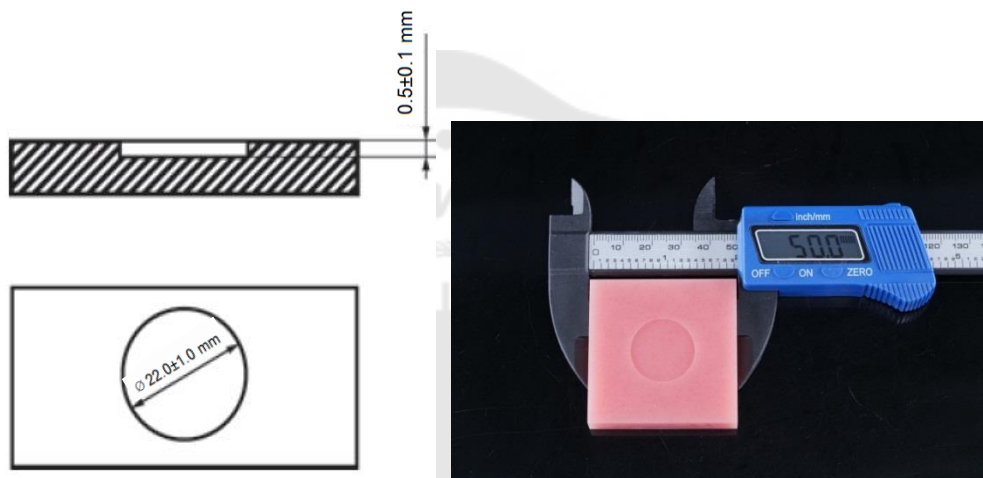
The sample holder made of 50.0 x 50.0 mm milled acrylic resin with a hole diameter of 22.0 ± 1.0 mm and a depth of 0.5 ± 0.1 mm.
